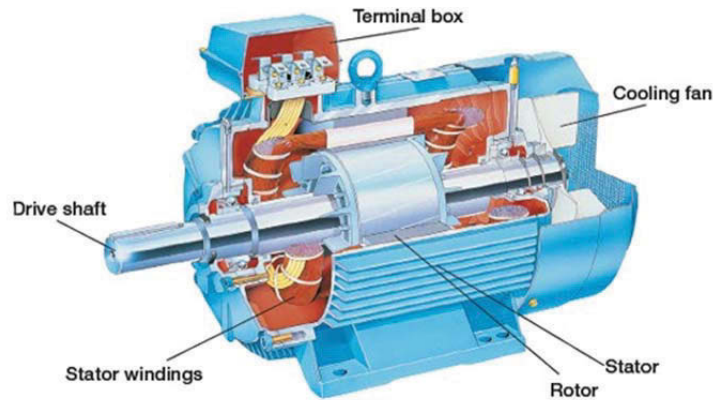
Induction machine exploded diagram (from [2.52])
